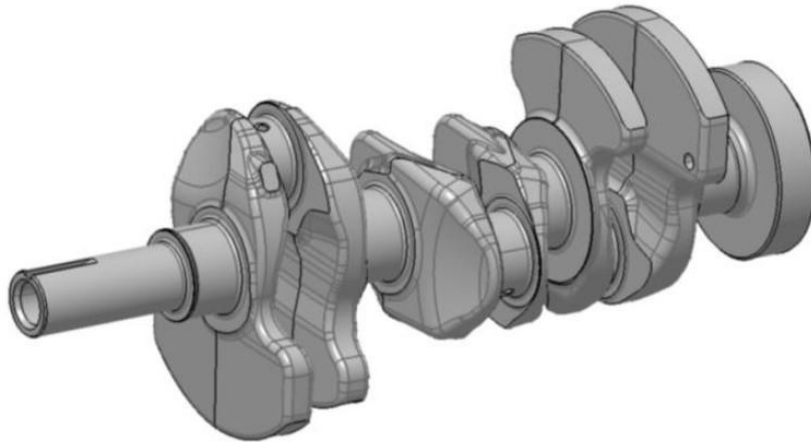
, The Thai-spec Honda City 1.0 Turbo's crankshaft is smaller and lighter. (to reduce weight of reciprocating parts).
